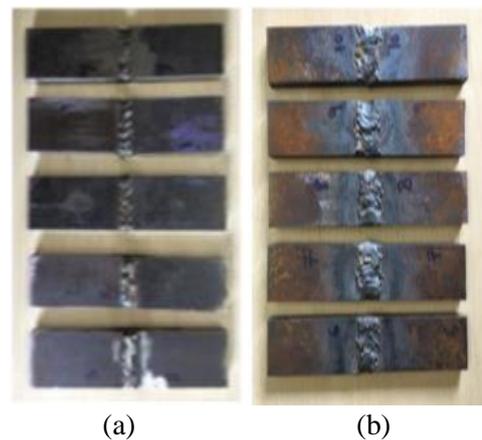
Welded samples (a) GMAW (b) OFW
